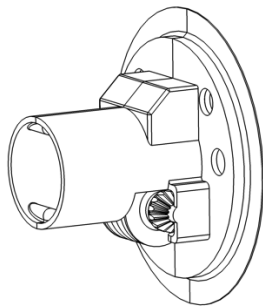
The lower thrust component that incorporates the element to keep the field sterile
